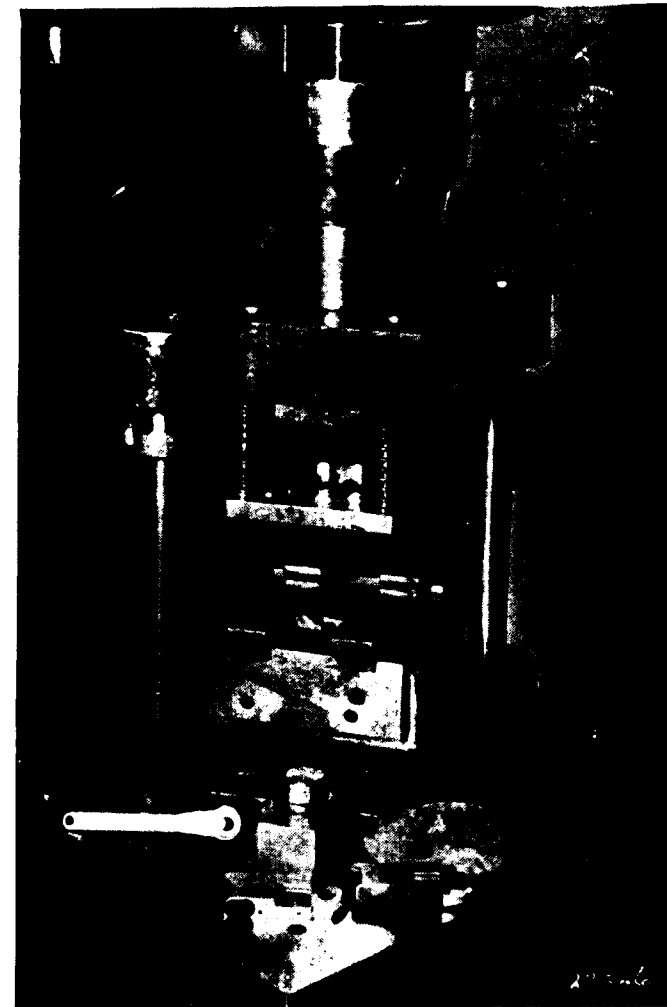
A Mills 15-ton Press equipped with a die-set for pressing the component.
